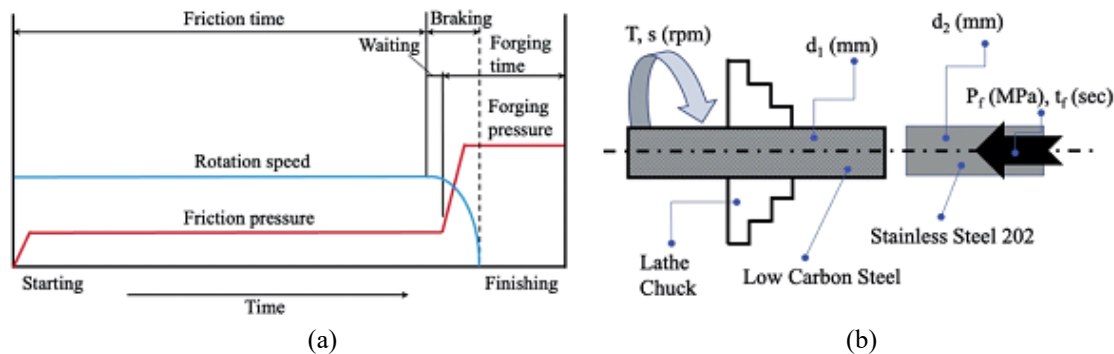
(a) Parameters of continuous-drive friction welding and (b) equal section parts used in the experiments.
